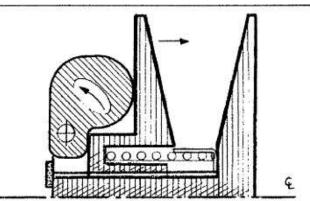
The Kidney Weight Clutch reduced the friction and introduced a flyweight system, but there was no cam to tune and the movable sheave still had its torque transferred through a spline.
